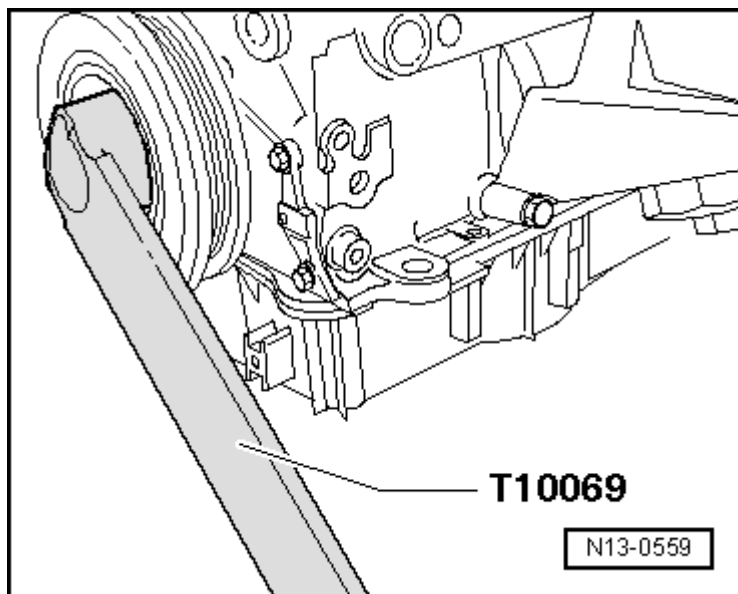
Counter-Holder T10069 To Hold Vibration Damper
